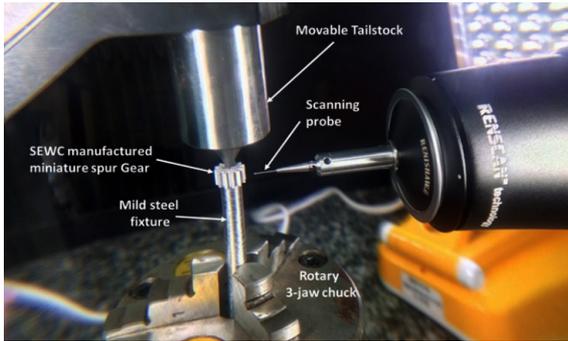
Microgeometry measurement of SEWC fabricated miniature gears by CNC smart gear metrology machine.
